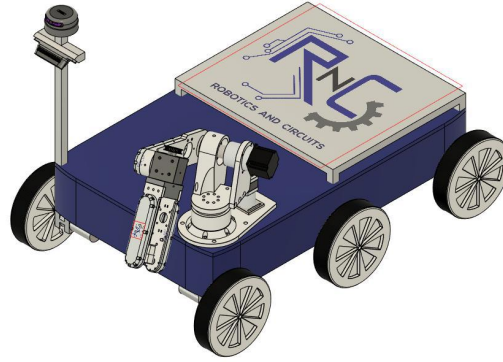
The Multipurpose Universal Chassis (M.U.C.) .
